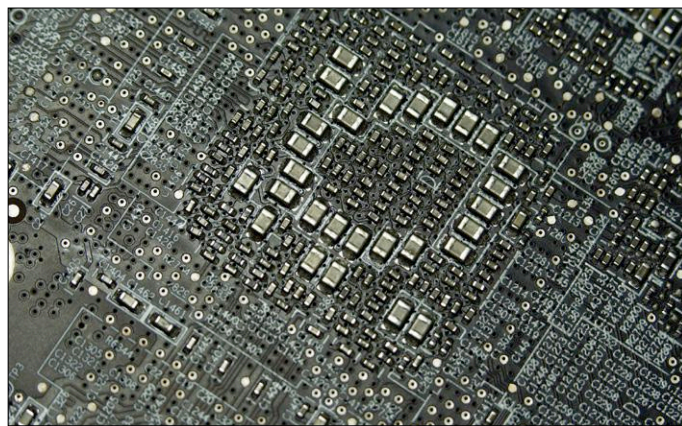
To provide proper decoupling for ICs with many pins, the decoupling capacitors can be placed on the other side of the board. Note how the component designators are placed outside the densely populated area in an intuitive way.
